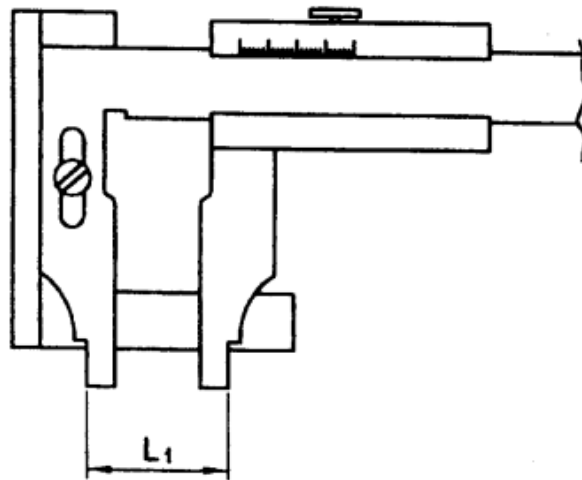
CALLIPER VERNIER FOR MEASURING DIMENSION, L_1
